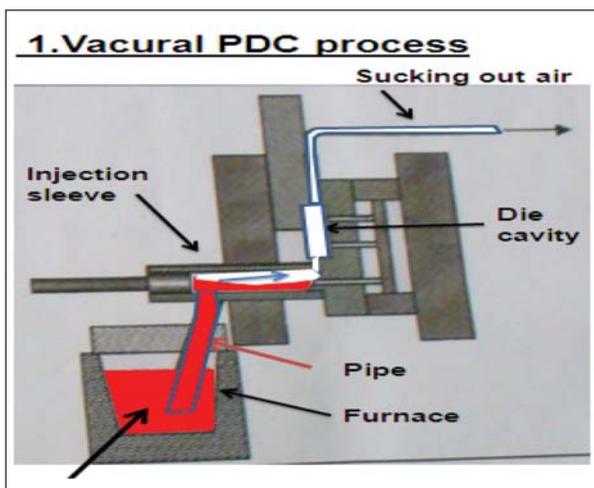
Molten aluminium in holding furnace which is tightly sealed.
